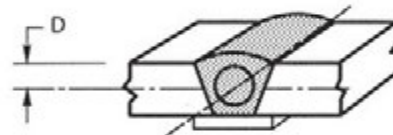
A GROOVE WELD TEST ASSEMBLY
